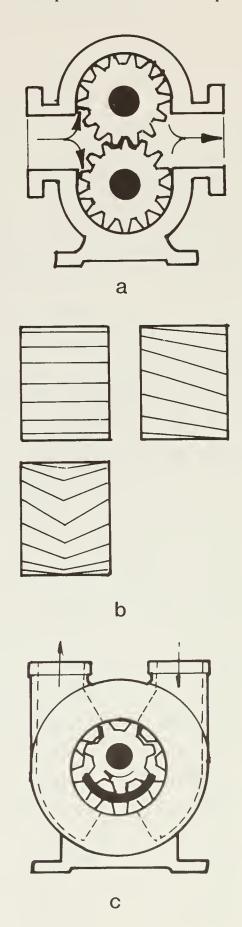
Gear pumps. (a) External gear pump. (b) Note the various gear teeth arrangements: spur, helical, or herringbone. (c) Internal gear pump.
